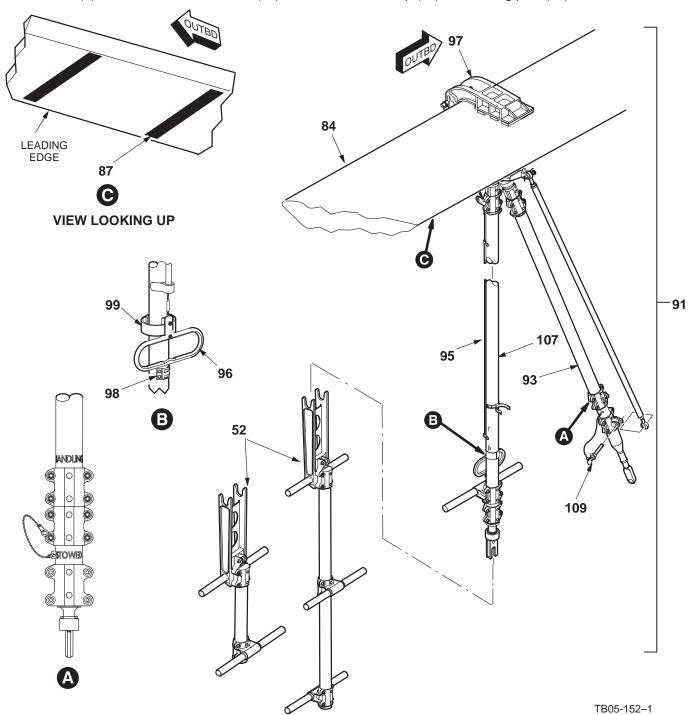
Securing Pole on R/H AFT Main Rotor Blade
